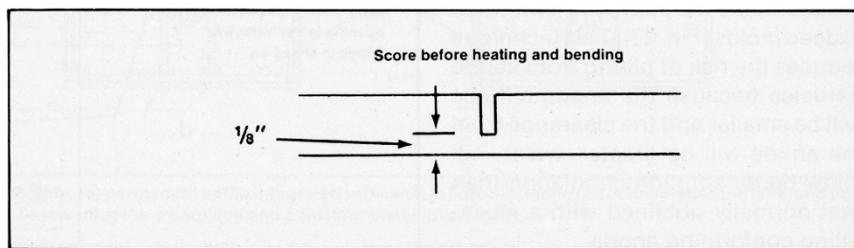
Method of scoring and bending a thick plastic sheet and filling by welding.
